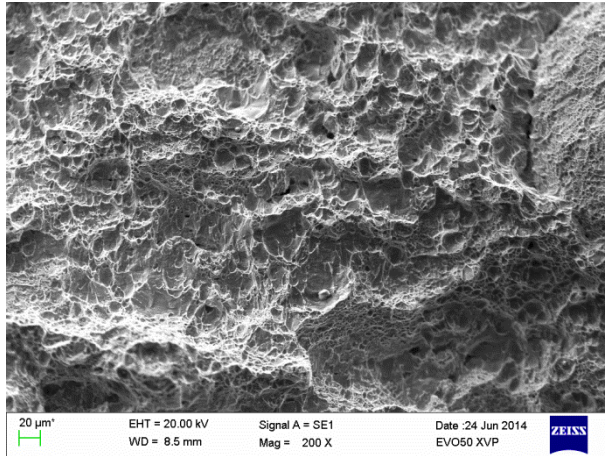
Fracture surface of impact specimen HIPed at 1150°C, 200x magnification [5]
